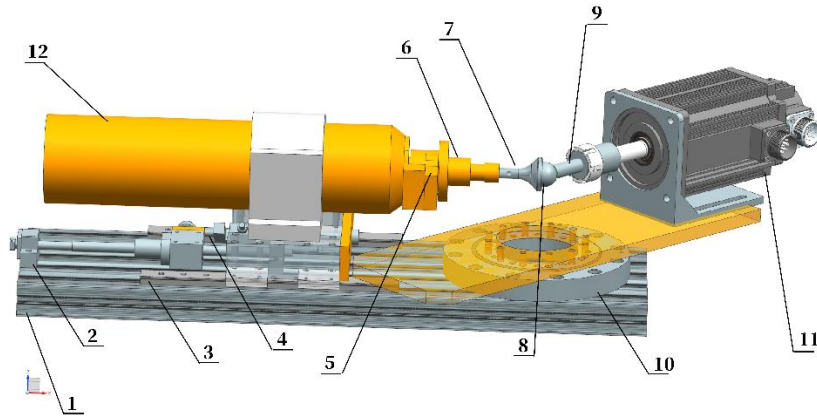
1- Workbench, 2- Ball screw, 3- Linear guide, 4- Force gauge, 5- Ultrasonic generating device, 6- Ultrasonic tool holder, 7- Cup-shaped grinding tool, 8- Ceramic ball, 9- Fixture, 10- Crossed roller bearing, 11- Servo motor, 12- Water-cooled spindle
